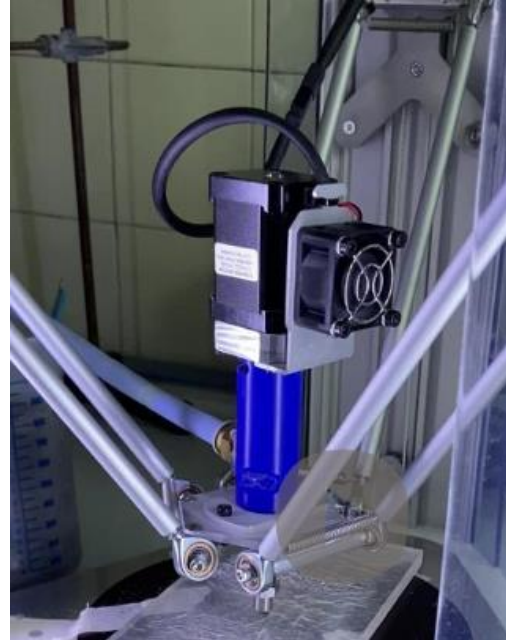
Extruder placement setup and connection to the aluminum tank and the 3D printer.
